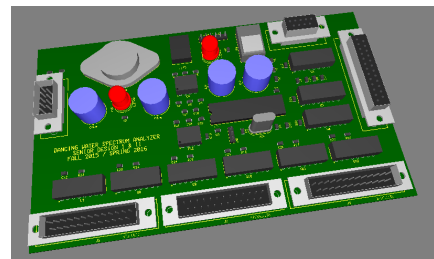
The figure above shows a 3D model of the PCB containing the low power components.
